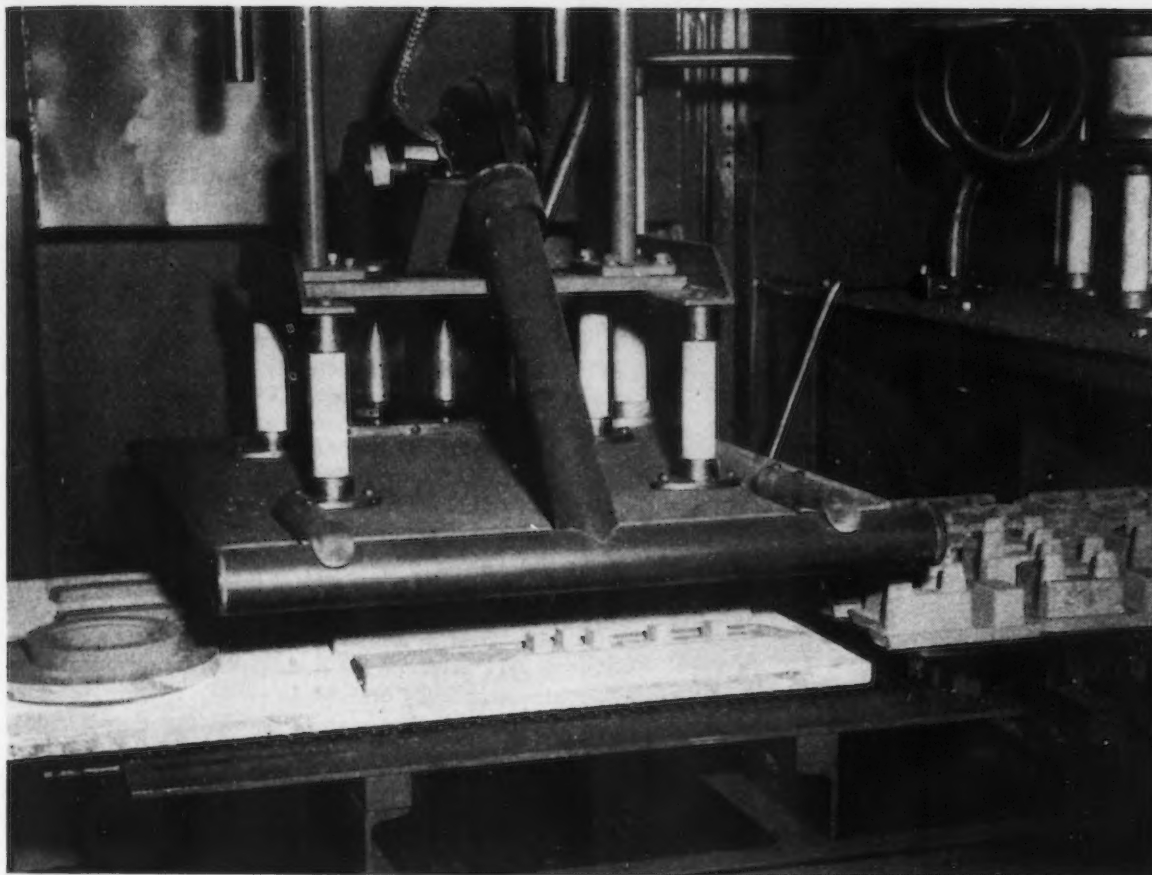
Interior view of the oven showing cores passing between the upper and lower electrodes. Portions of the ventilating equipment are also shown.
